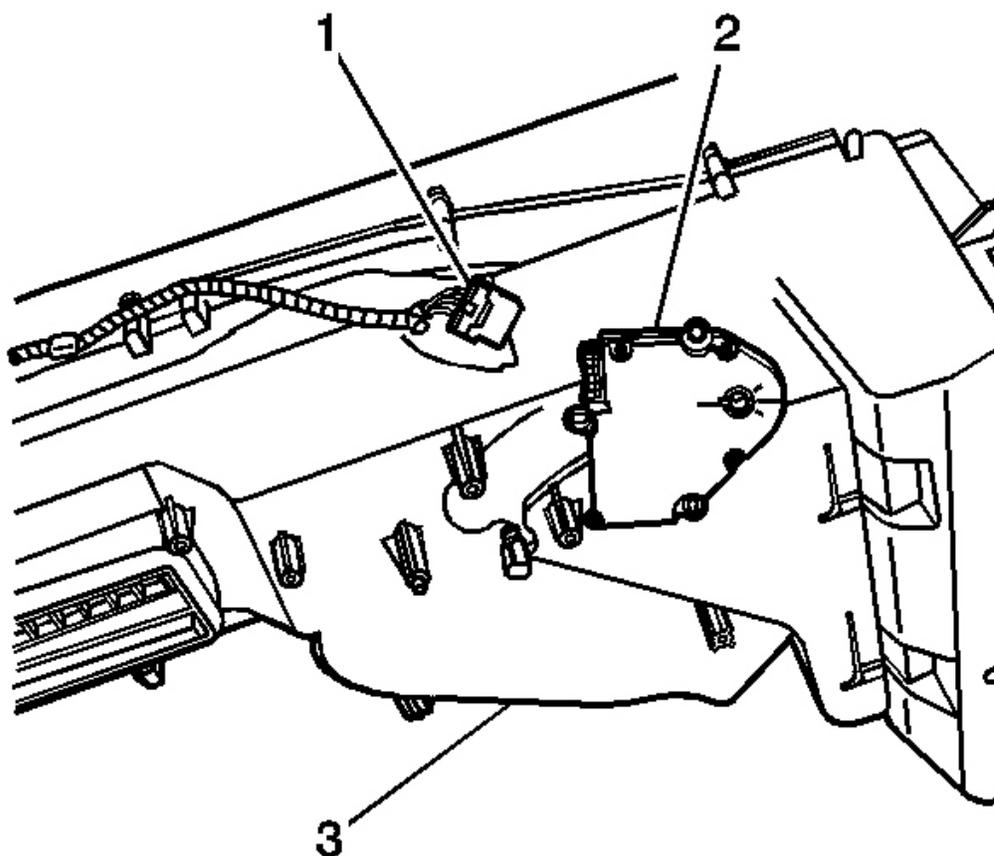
Left Air Temperature Actuator & HVAC Module Assembly
